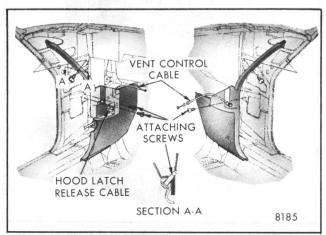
Shroud Side Finishing Panel - "B-C-E" Styles ("A" Styles Similar)
